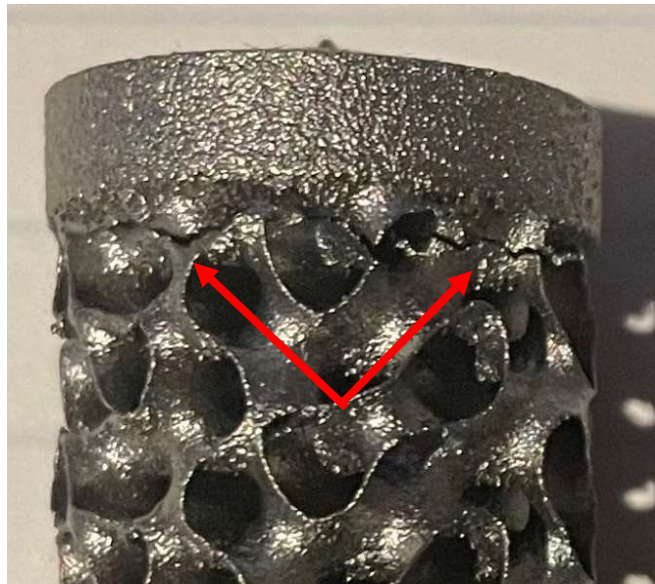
Picture of the cracks developed in a 90P specimen.
